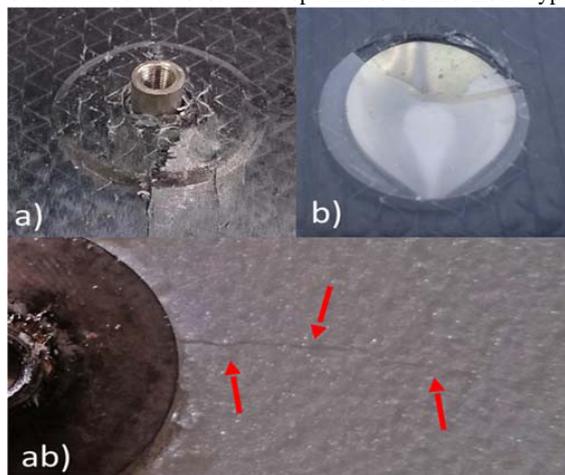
Pictures of the failed specimen: a) above; b) below; ab) above and below insert, cracks in the core going out from the insert can be seen, after manually removing the upper facesheet for insert ab.
